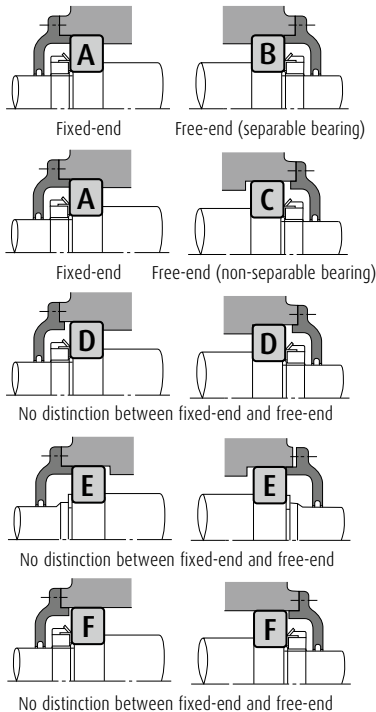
Bearing Mounting Arrangements and Bearing Types
